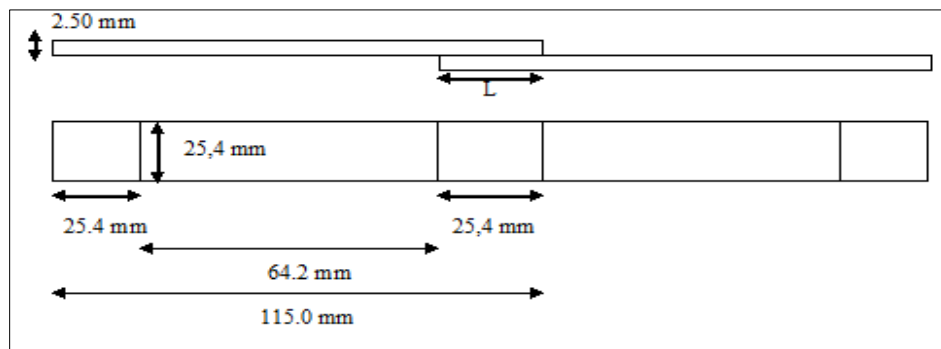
Form and dimensions of test specimen used for lap shear tests
